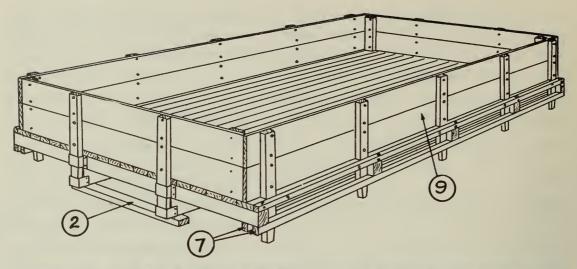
Box or side wall sections are fitted with stakes so that they can be removed from the rack. Side wall sections may range in height from 2 feet to 5 feet.
